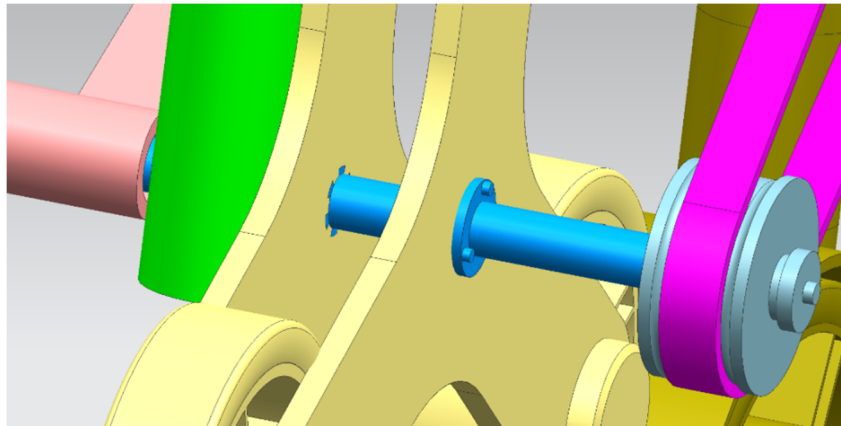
Three-dimensional model of connecting small belt wheel and triangle wheel
